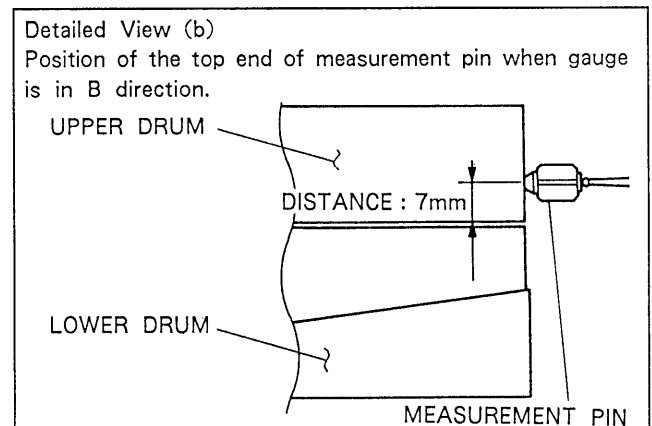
Upper Drum Eccentricity Adjustment
